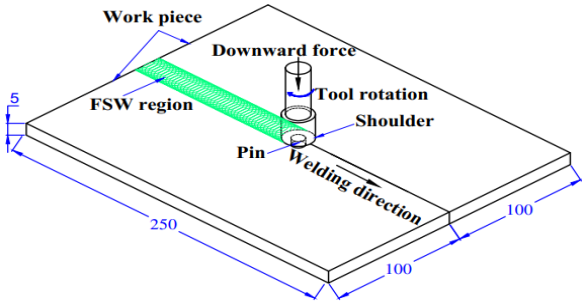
The working mechanism of the Friction Stir Welding process
